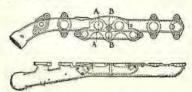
Top and side view of an exhaust-heated intake manifold.
